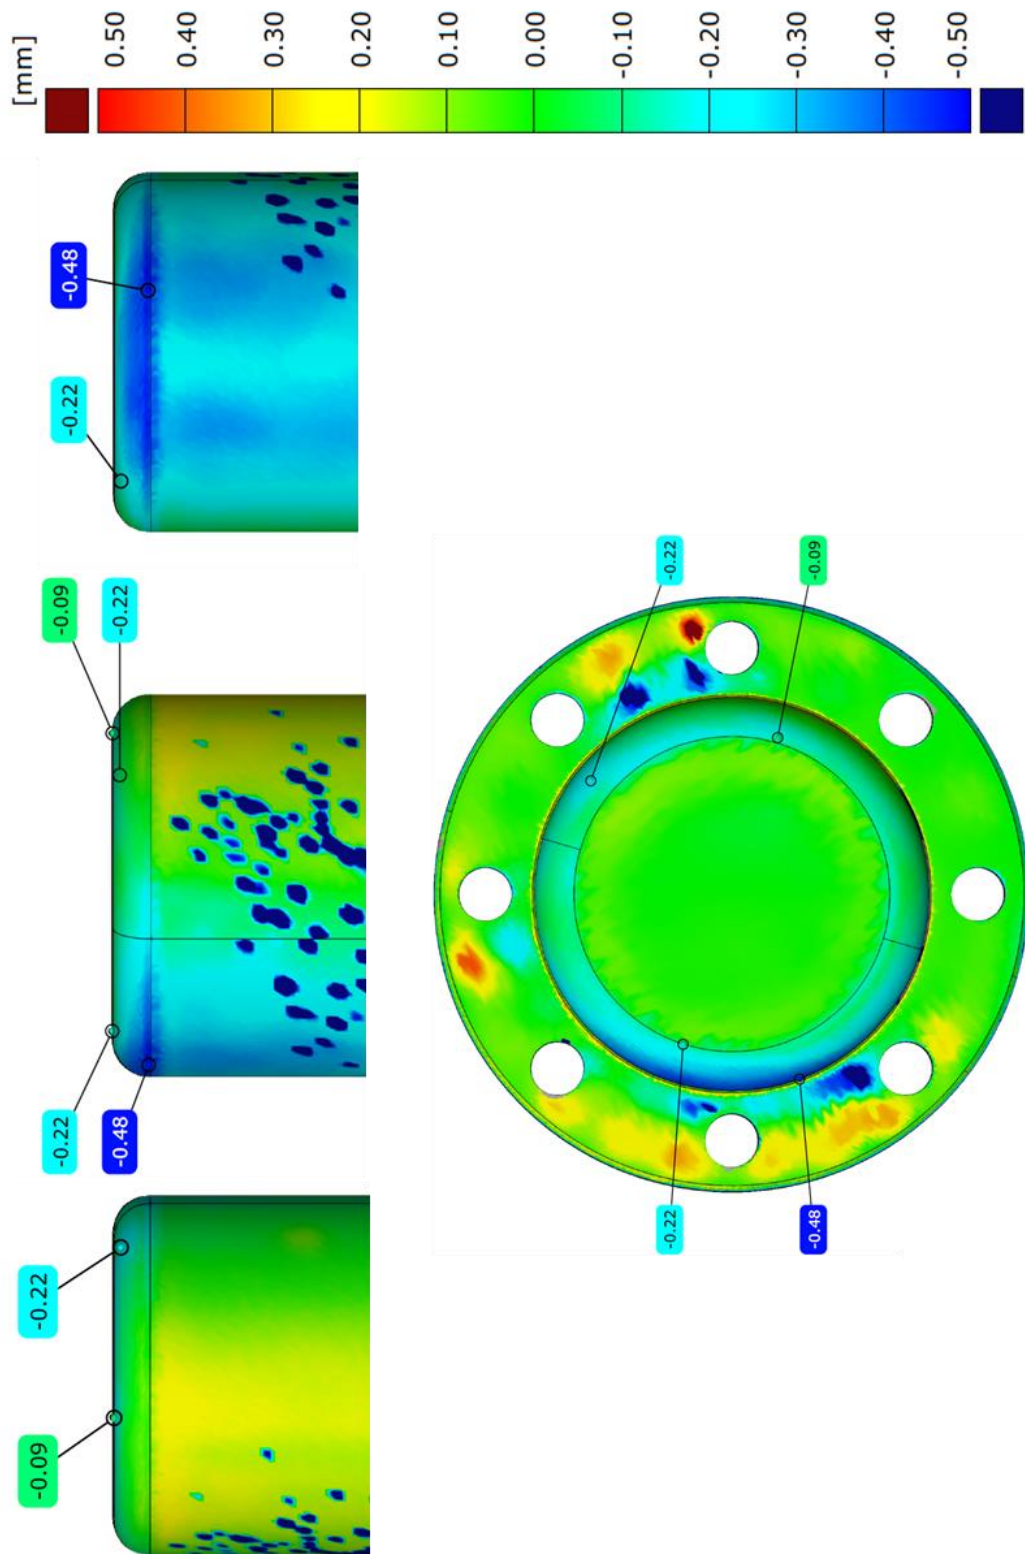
Variance between the CAD drawing and the optical measurement of the punch after the deep drawing tests
